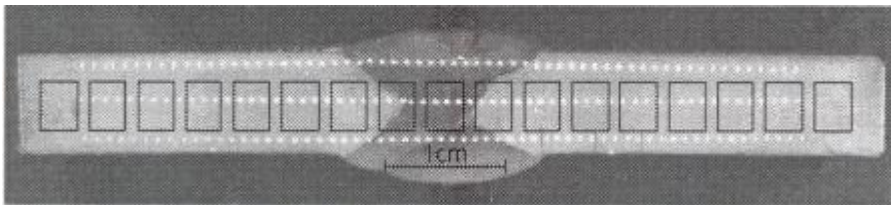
Hardness profiles and tensile test specimens cut from butt-welded plate (Matusiak 1999).
